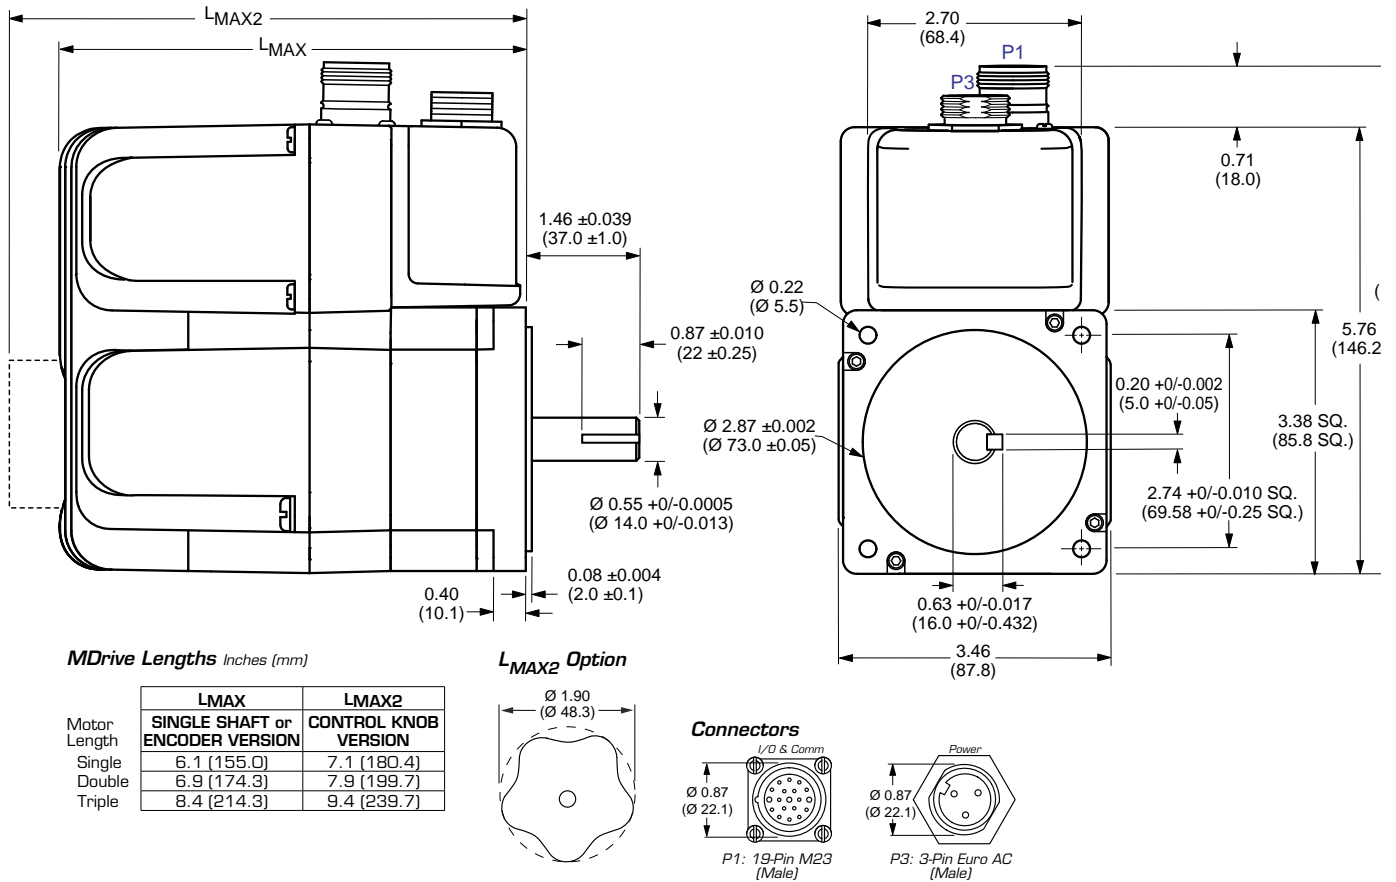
External shaft mechanical specifications - dimensions in inches (mm)
